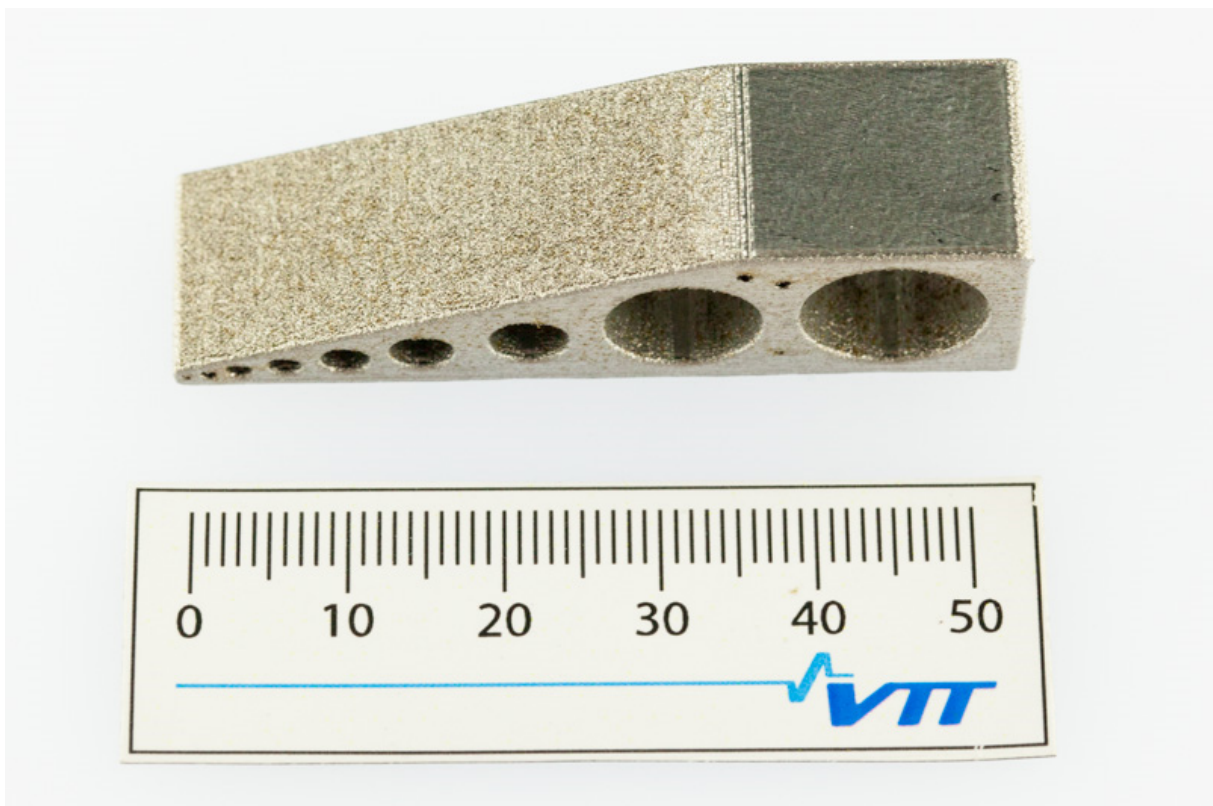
Transversal round holes test print in H13 tool steel at 30 μm layer thickness.
